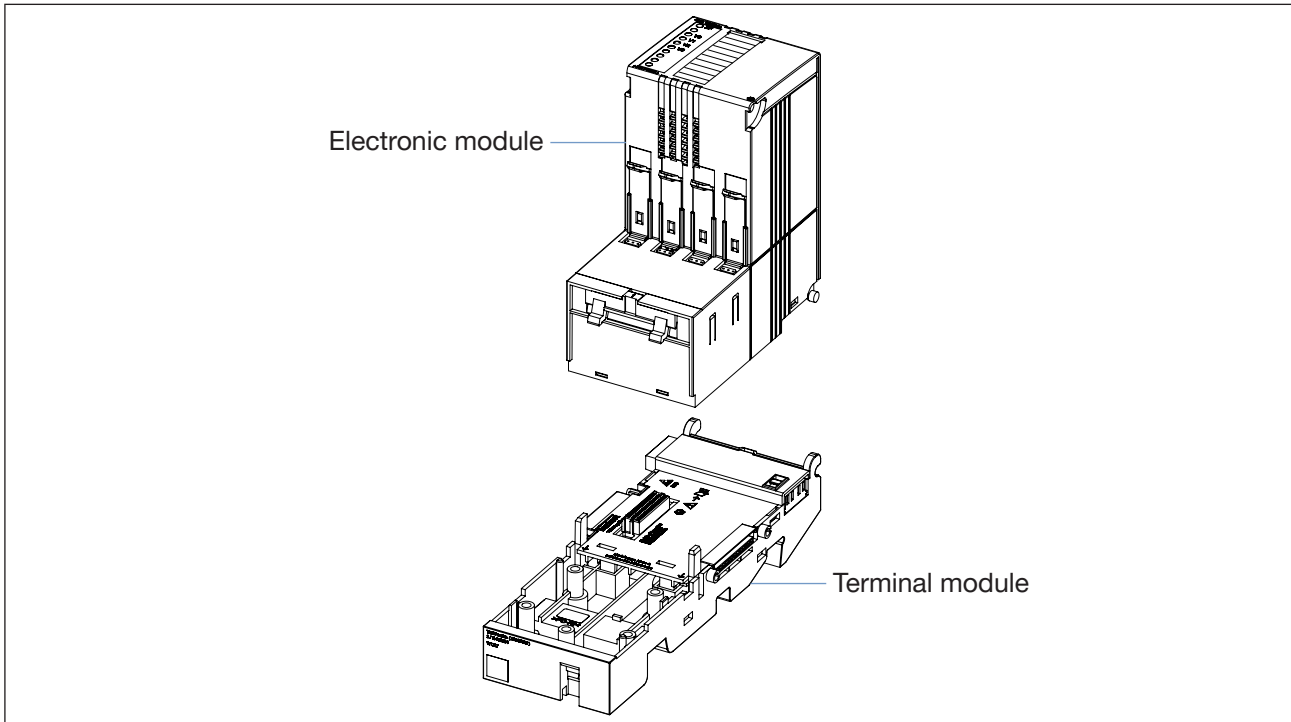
Electronics assembly valve block AirLINE Ex, REV.2, Type ME0... (modular electronics assembly)
